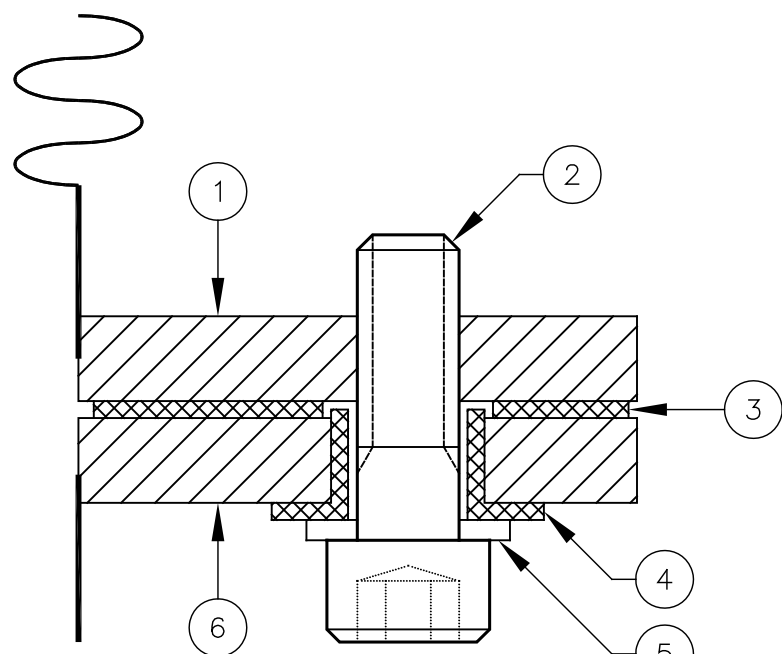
WATER DRAIN INSTALLATION (NOT TO SCALE)
